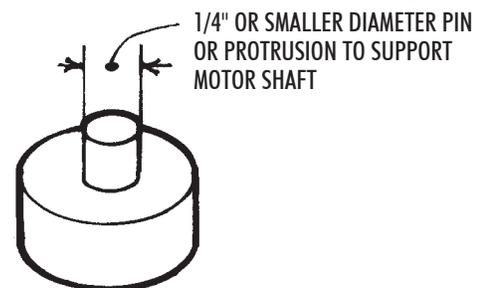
Shaft support fixture. This can be turned from metal on a lathe. As an alternate, any metal pin that can be properly held in a vise or a hole in a block of wood to support the end of the shaft during the reassembly process may be used. The support pin on the end must be of a size that will fit through the clearance hole you drilled in the end cap.
